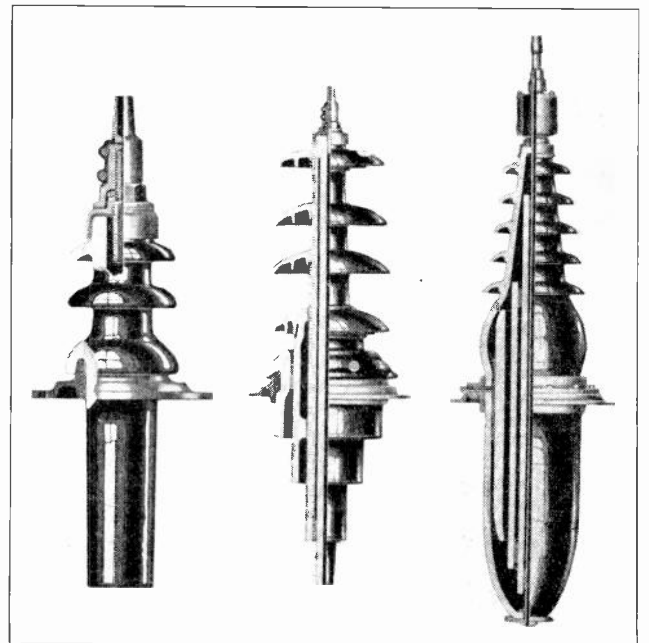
Three different types of insulator bushings used for transformers and oil switches where the high-voltage conductors enter the metal tanks. Courtesy Ohio Brass Co.
